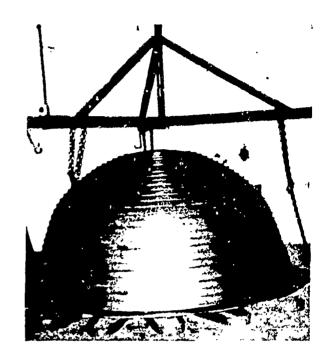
INSERTION OF 6 FT. DIAMETER FIGURE 15. 72" DIAPHRAGM ASSEMBLY DIAPHRAGM INTO VACUUM BRAZING FURNACE
